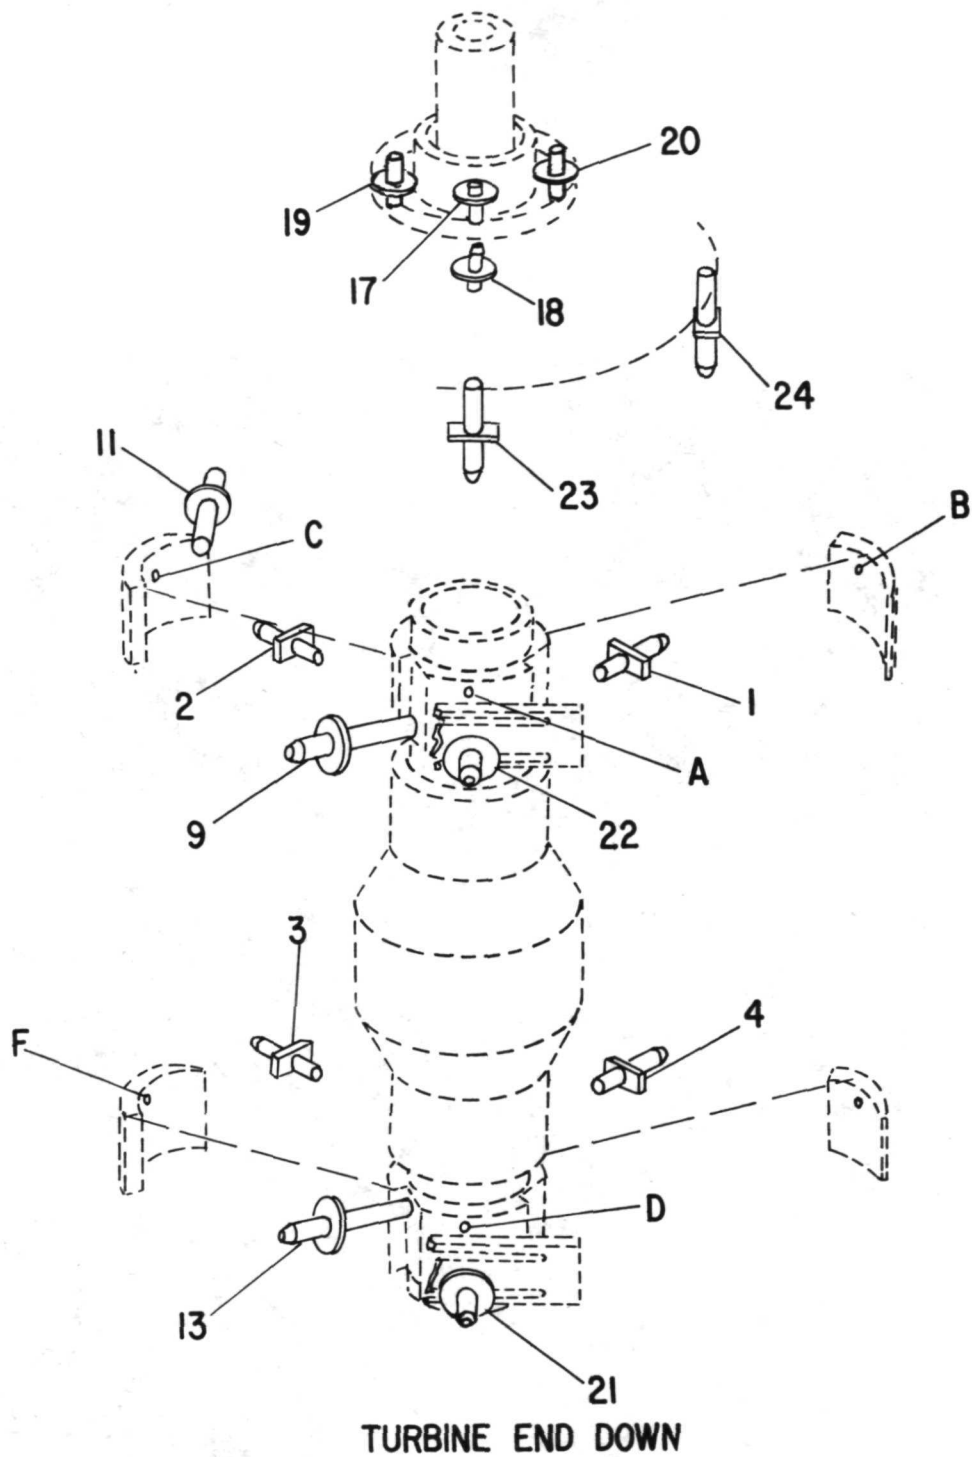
Proximity Probe Locations on BRU Simulator Rotor and Bearings
